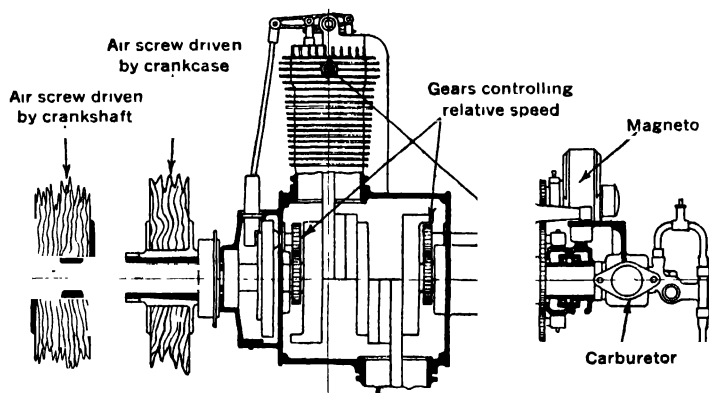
The E.J.C. Engine Illustrated Above Was Known as a Double Rotary Because the Crankshaft Turned in One Direction and the Crankcase and Cylinder Assembly in the Opposite Direction.
